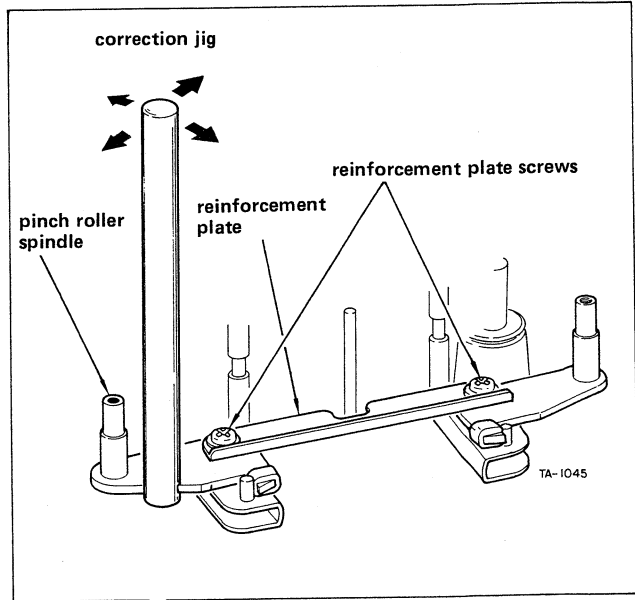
Correction of pinch roller/capstan non-parallelism
